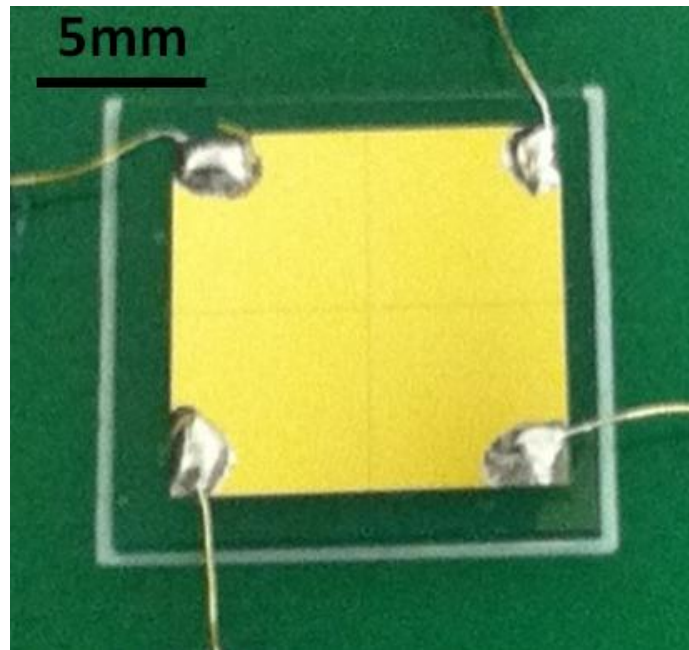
Quadrupole electrode chip after being diced, bonded to the surface of a PCB, and soldered
